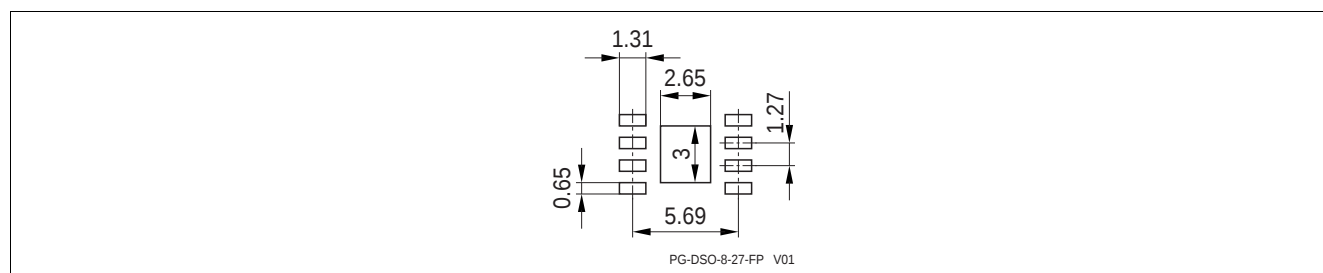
Recommended PCB Footprint for Reflow Soldering (dimensions in mm)
